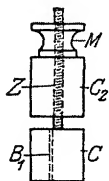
Simple device for making tungsten spirals for use as hot filaments.
